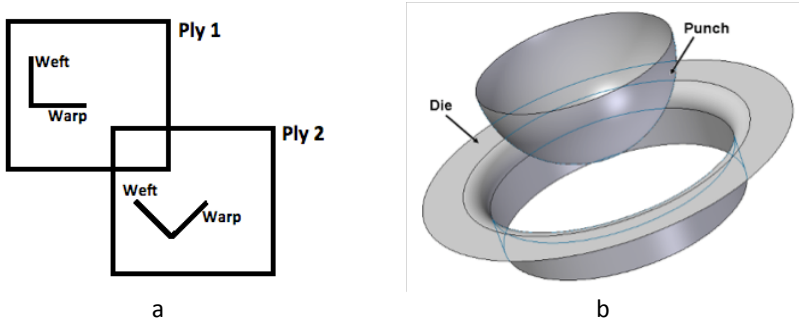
Deepdrawing of multilayered composites showing (a) the lay-up of two plies that form the multilayered laminate and (b) the set-up of forming stage
